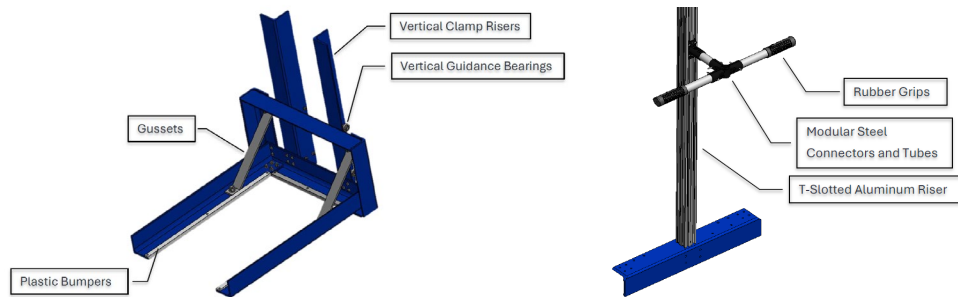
Red7signed End Effector (Left) and Handle Assembly (Right)
